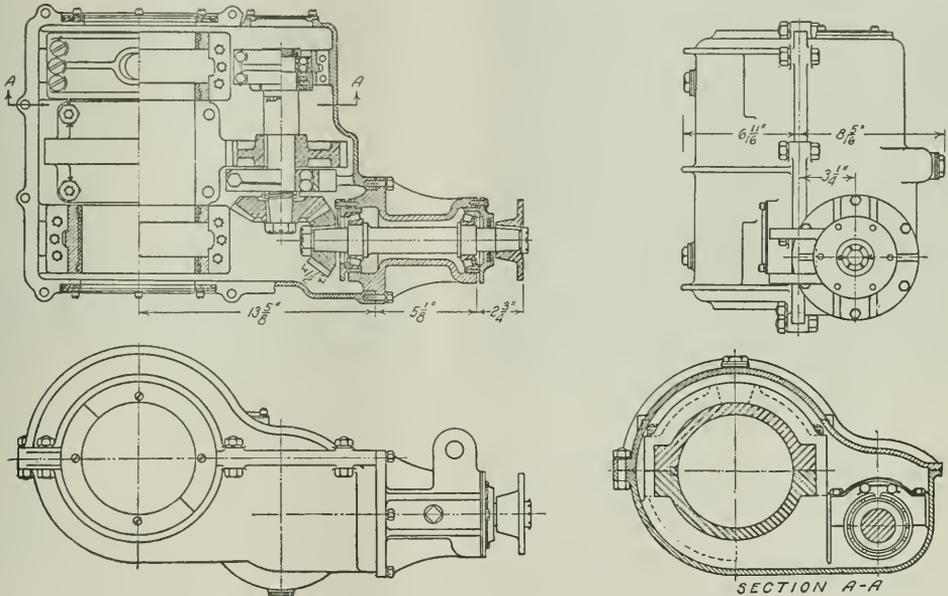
Assembly Drawing of Main Part of Gould Drive
